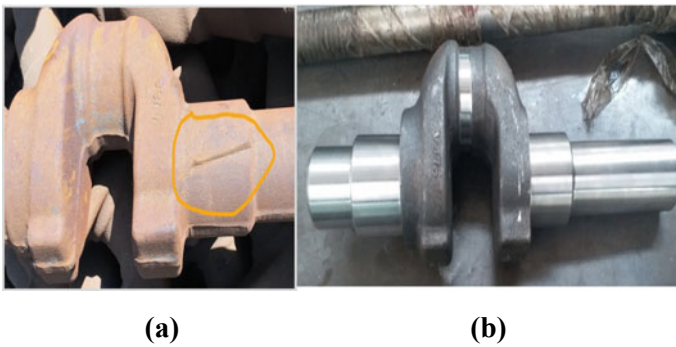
Mislocation on bearing area (a) and machining error due to oversize (b)
